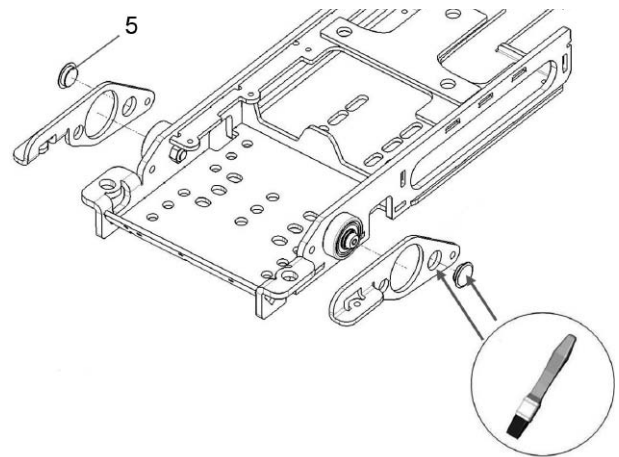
Lubricate the hole in the plate with grease before mounting the slide puck.
